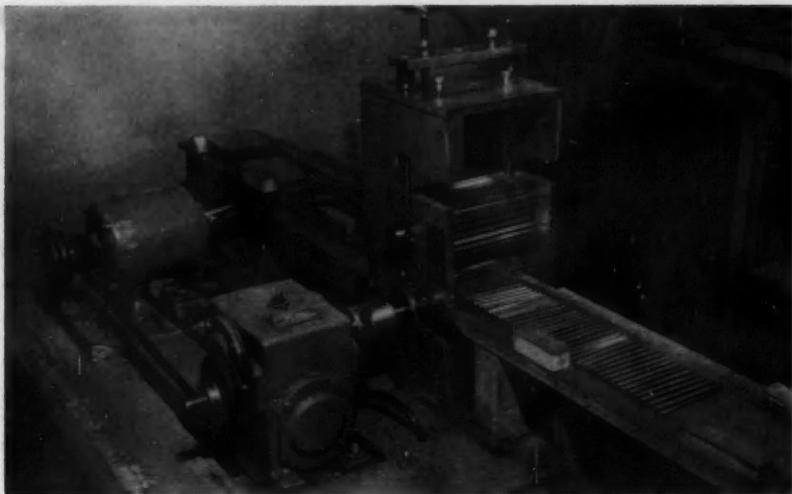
Form rolling 17-7PH honeycomb core strip.
